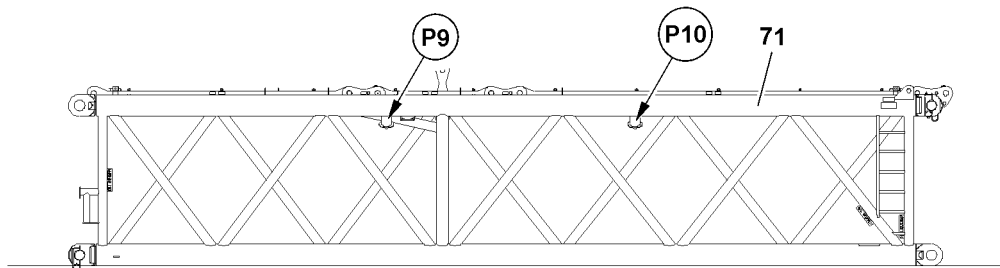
Fastening points LI-intermediate section 12 m 2621.20
